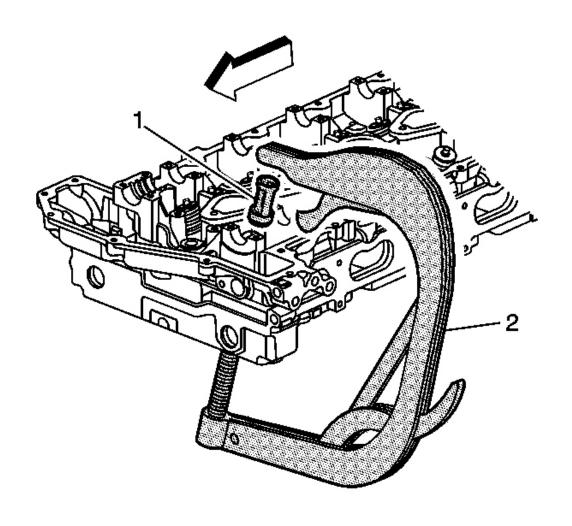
Using J 8062 & J 42037 To Compress Valve Spring Courtesy of GENERAL MOTORS CORP.
